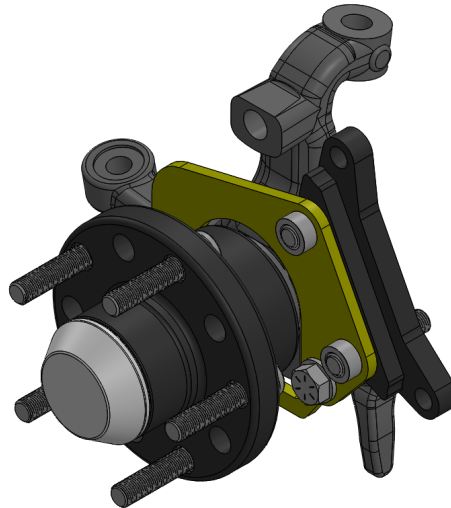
Cotter pin and dust cap installed (left driver side shown)
